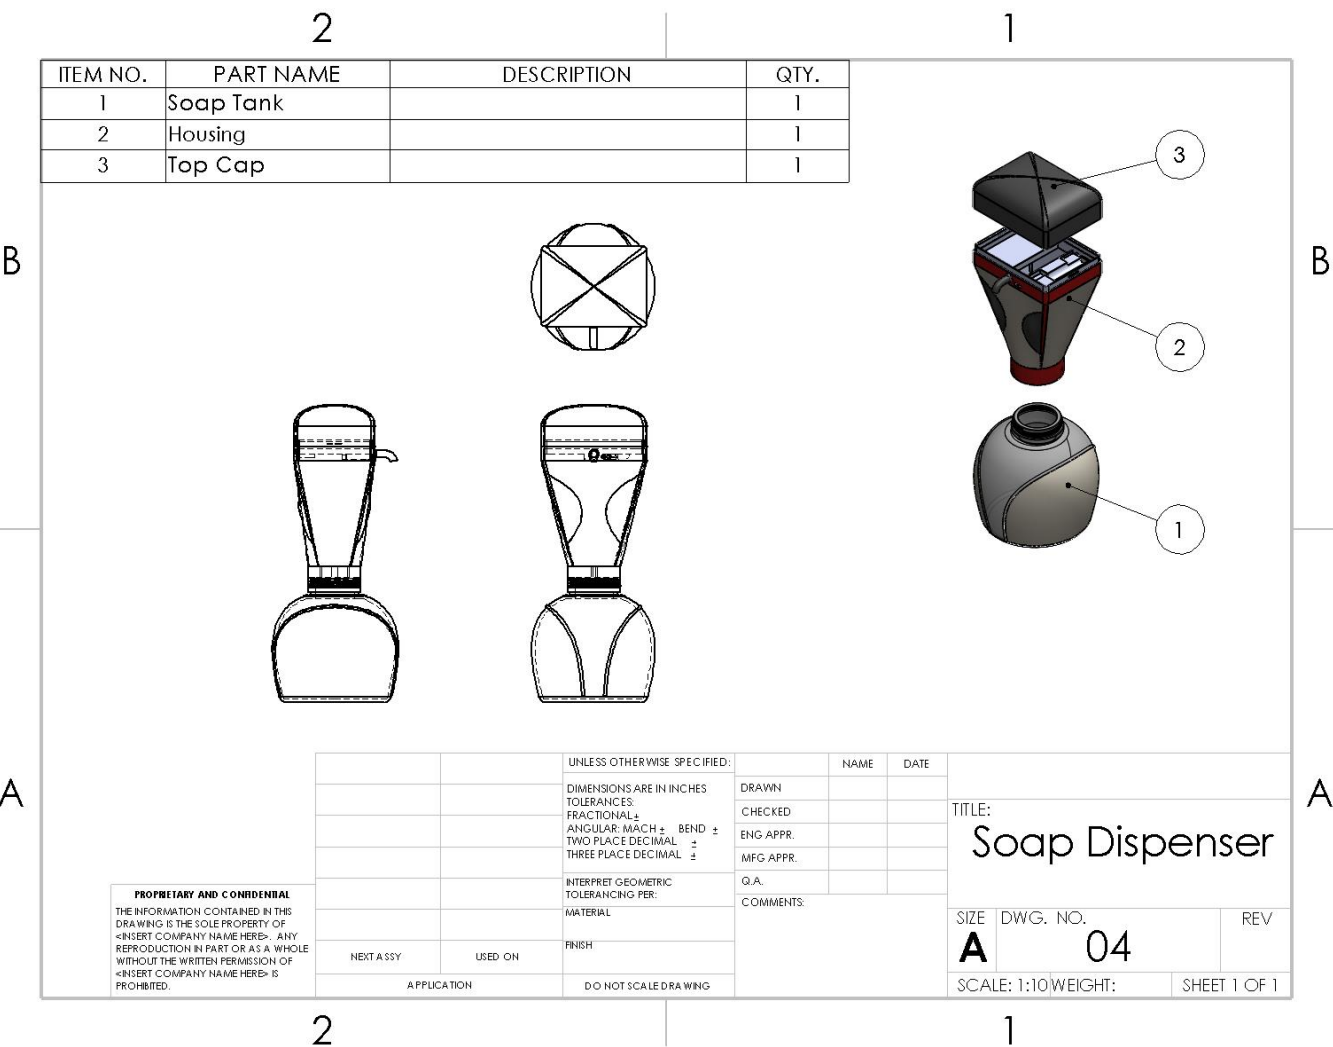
Soap Dispenser Assembly 2D Sketch with isometric exploded view
